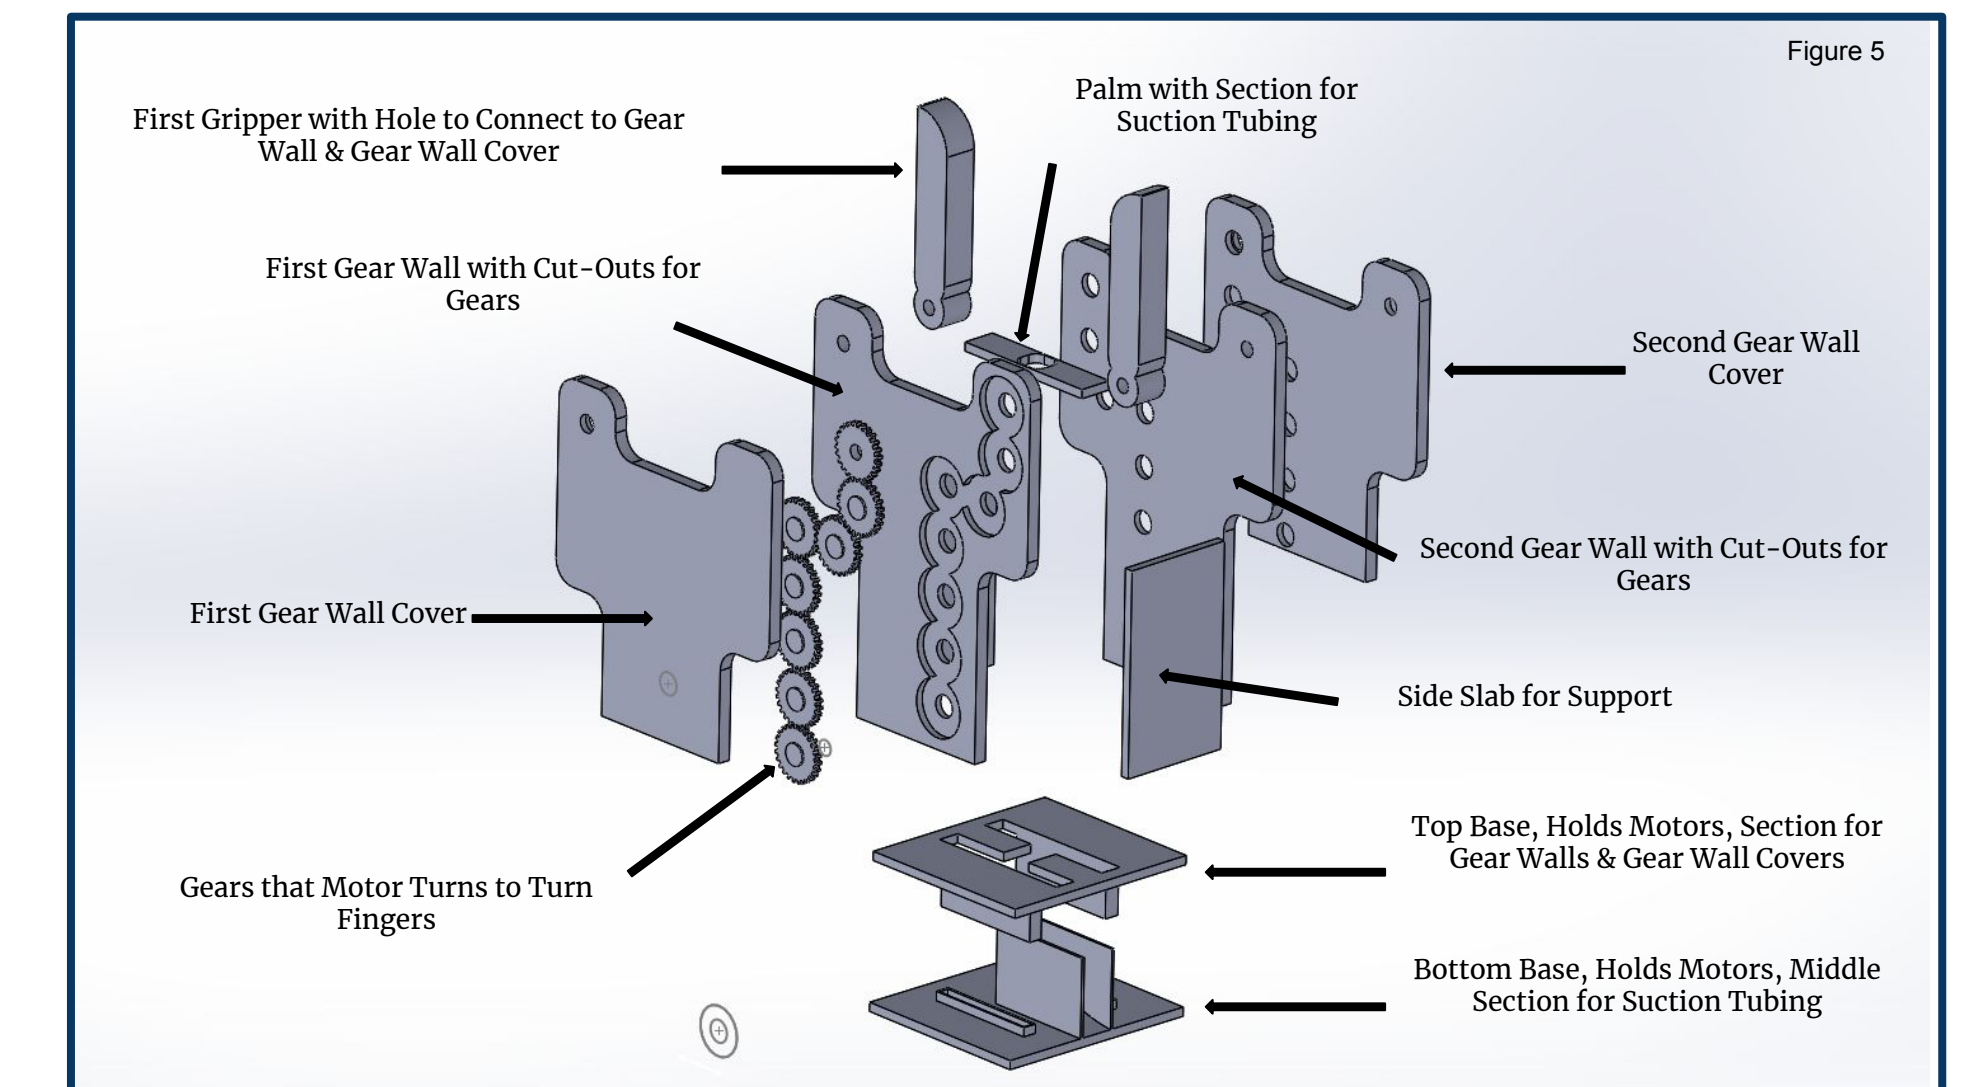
(above): 3D exploded model of claw portion of robotic gripper. Suction line is inserted through the inside of the gripper body. Pump mechanism mounted on robot body. Pneumatic components not shown.
